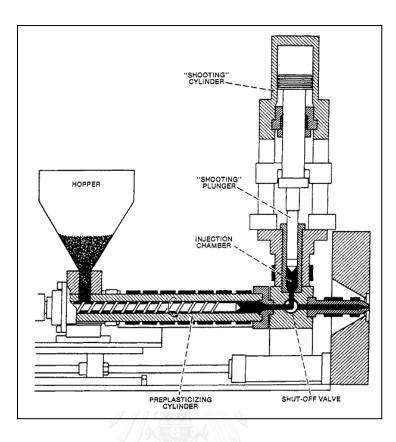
Two-stage screw injection machine with right-angle design (Rosato et al., 2000)
